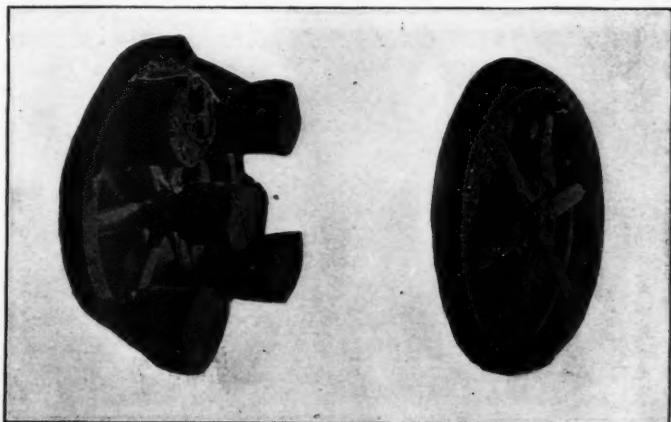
WHEEL WITH SHRINK HEADS THAT ARE TOO HEAVY
